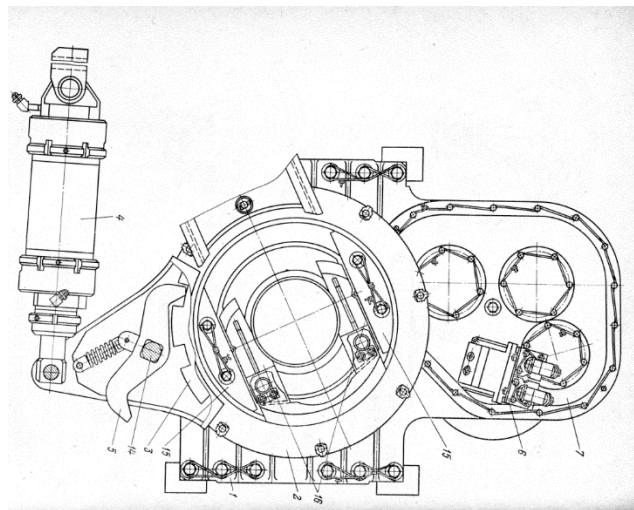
Mechanism for Connecting and Disconnecting Drill Rods
